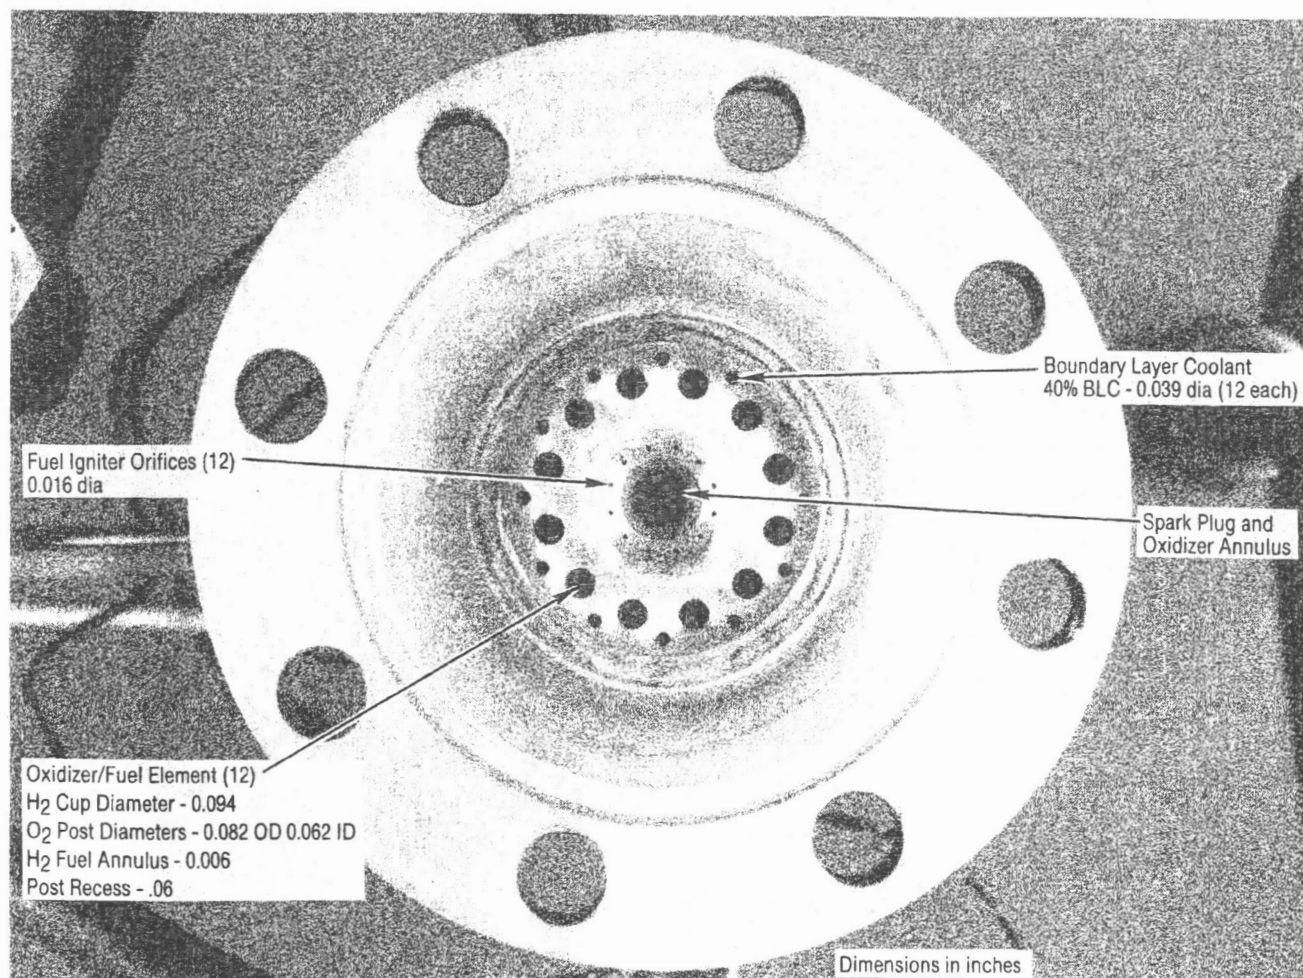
GO_2/GH_2 Injector Assembly Layout
